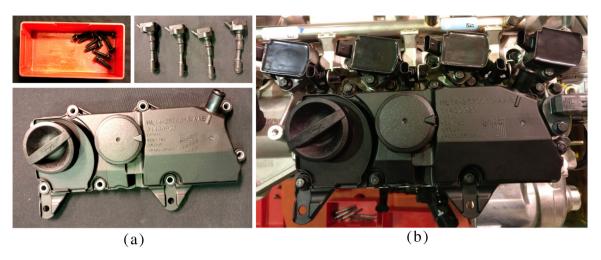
Example assembly task (a) parts before assembly; (b) the car engine after the assembly.
